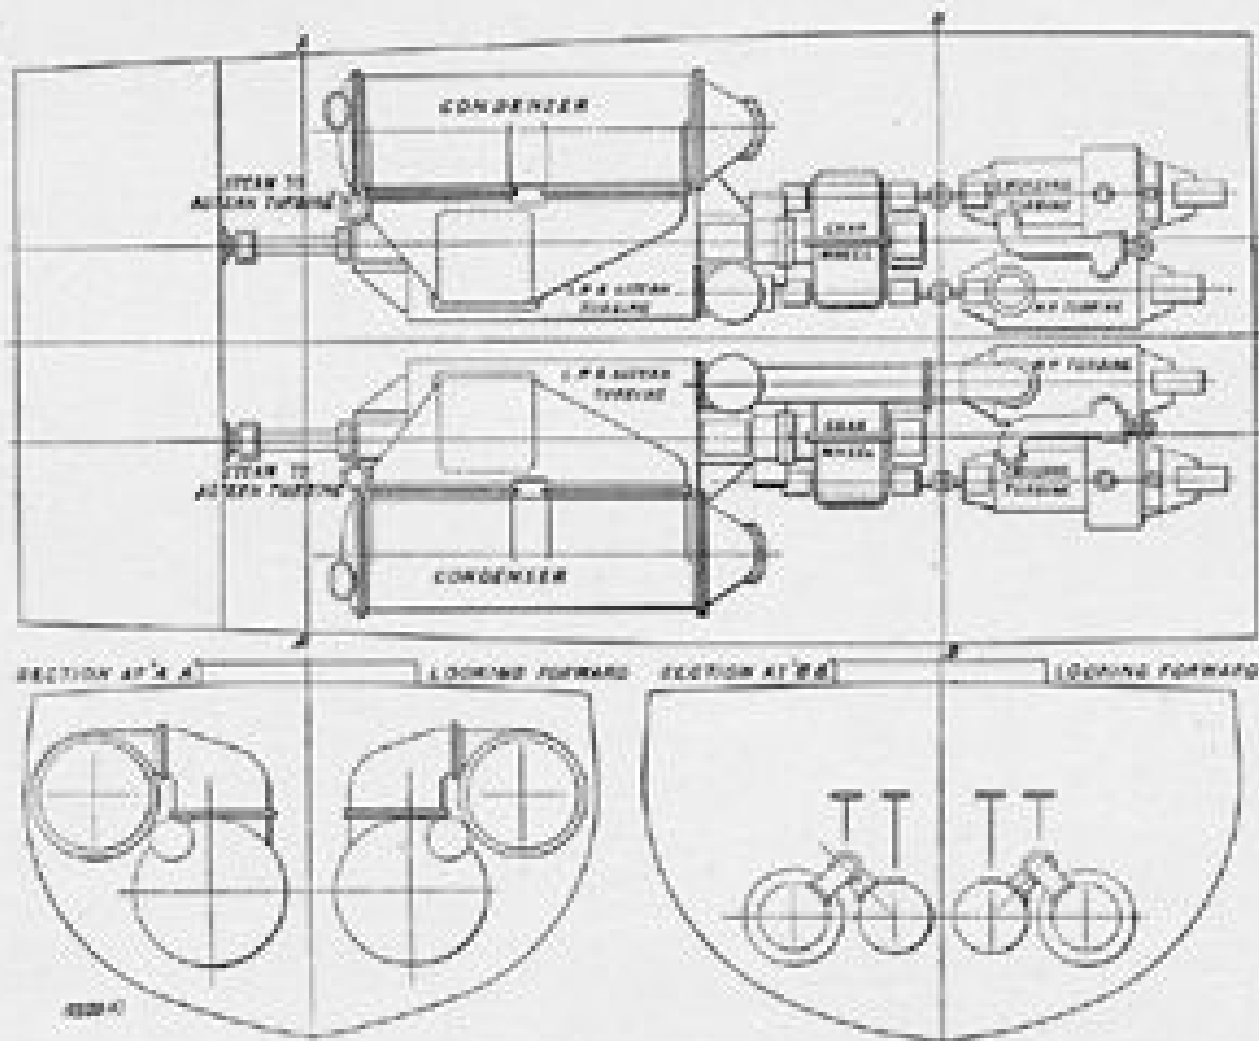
Geared Turbines in Twin Screw Torpedo Boat Destroyer.
